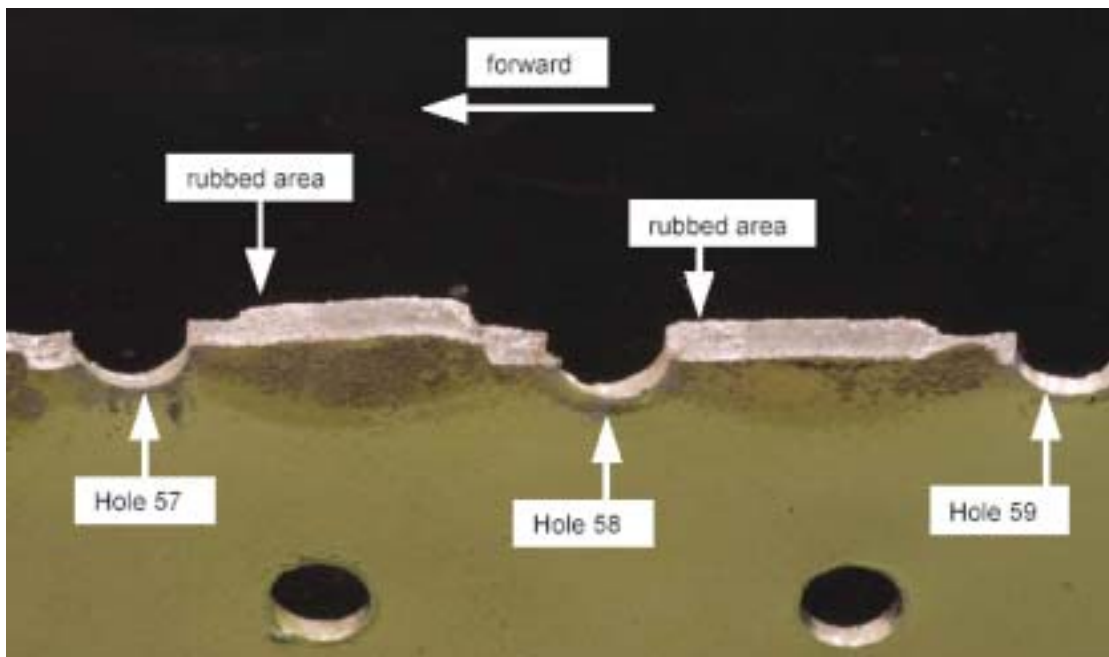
Photograph of the fracture surface at Holes 57, 58, and 59. The shiny areas are indicative of rubbing with the mating fracture surface and appeared consistently forward of this area, but were not present aftward beyond Hole 62.
